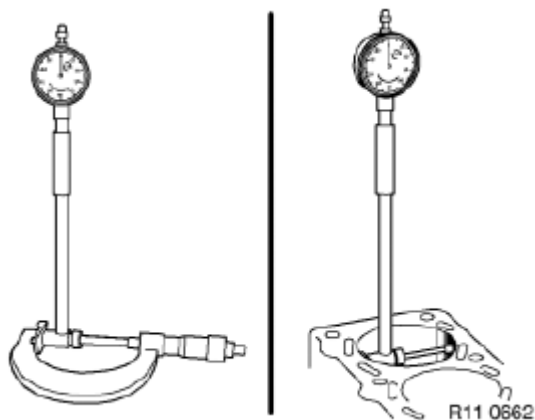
Adjusting Micrometer To Cylinder Bore Of Engine Block
